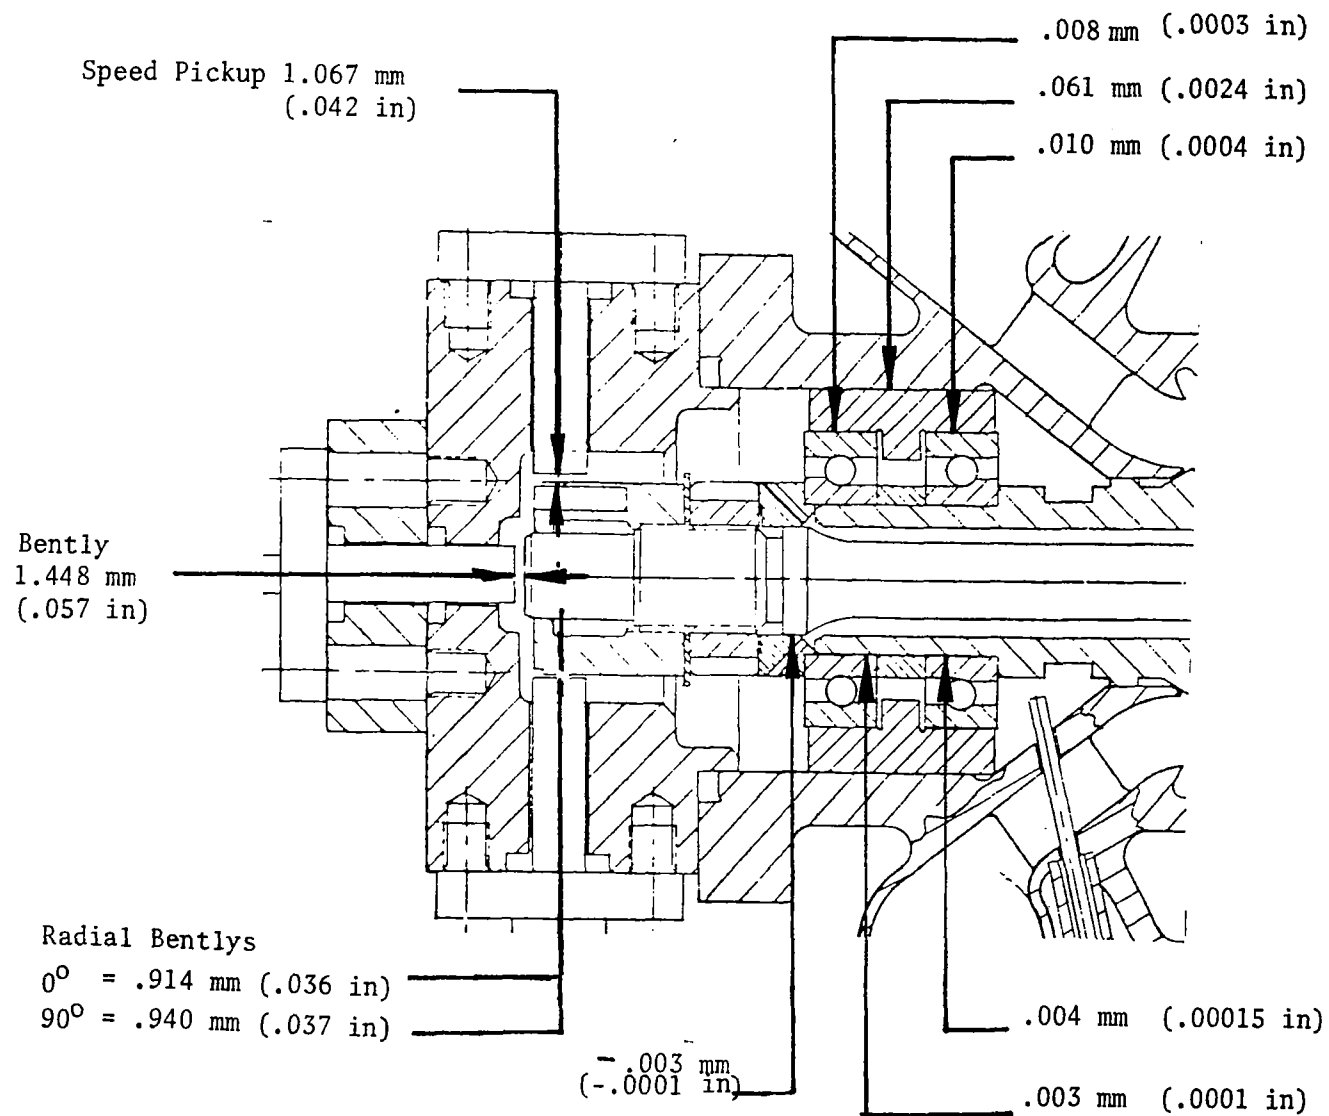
Mark 48-F S/N 01-0 Assembly Instrumentation and Front Bearing Clearances
